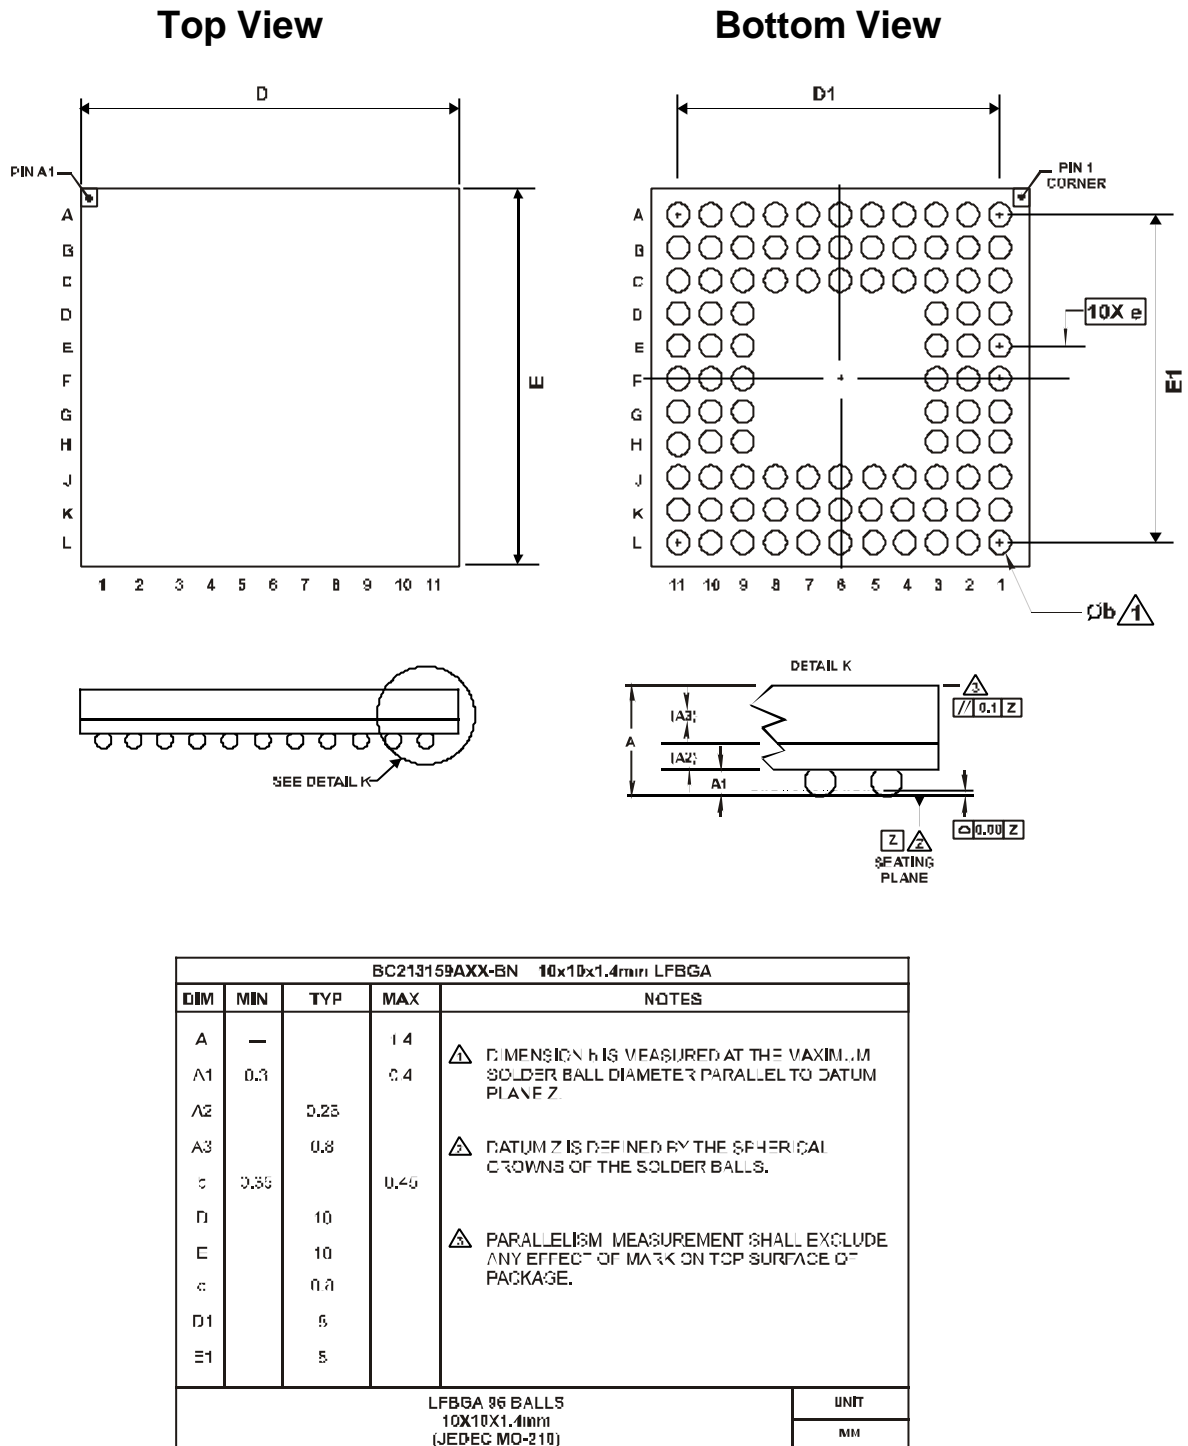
BlueCore2-Flash LFBGA Package Dimensions
